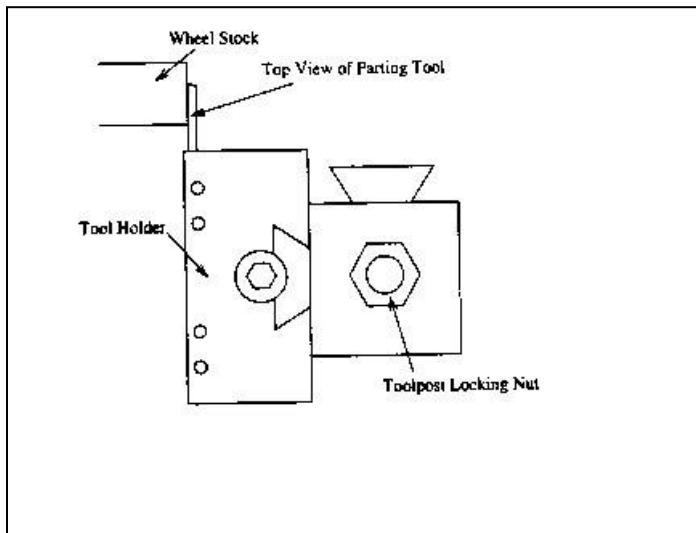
Aligning the Parting Tool So It Is Perpendicular.
